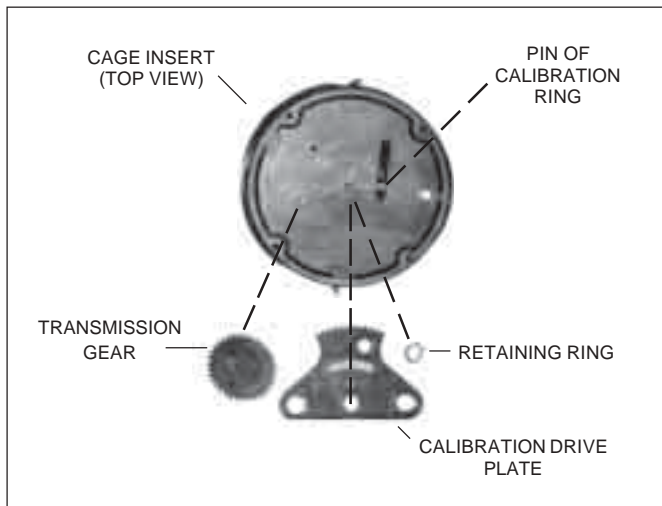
Calibration Ring/Linkage Assembly, 6"
